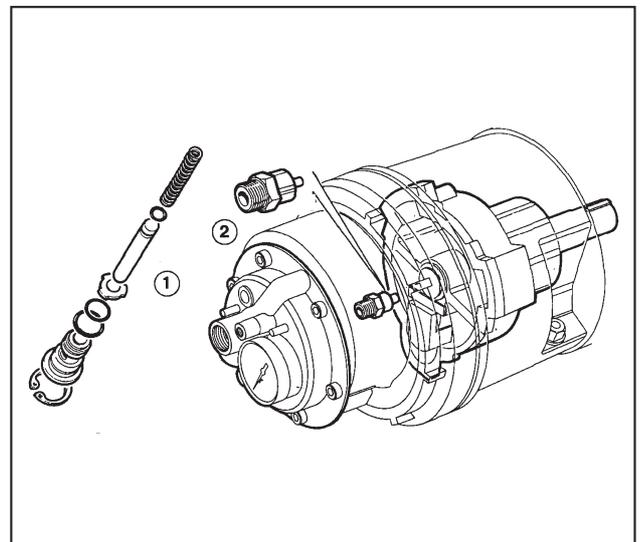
Minimum Pressure Valve and Safety Valve Lift Pressure
